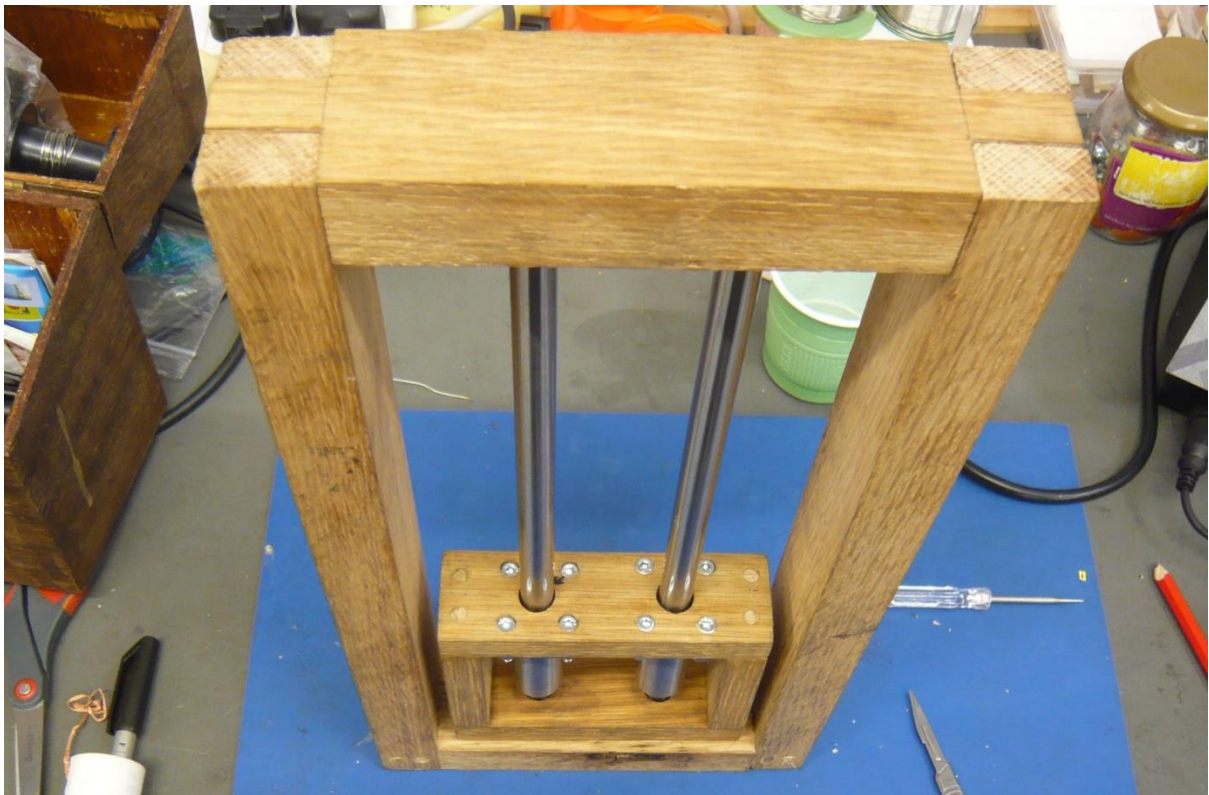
or insert the steel shafts and linear ball bushings (purchased on Ebay). I bolted both of the (flanged) ball bushings onto the inner frame (see above photo).
